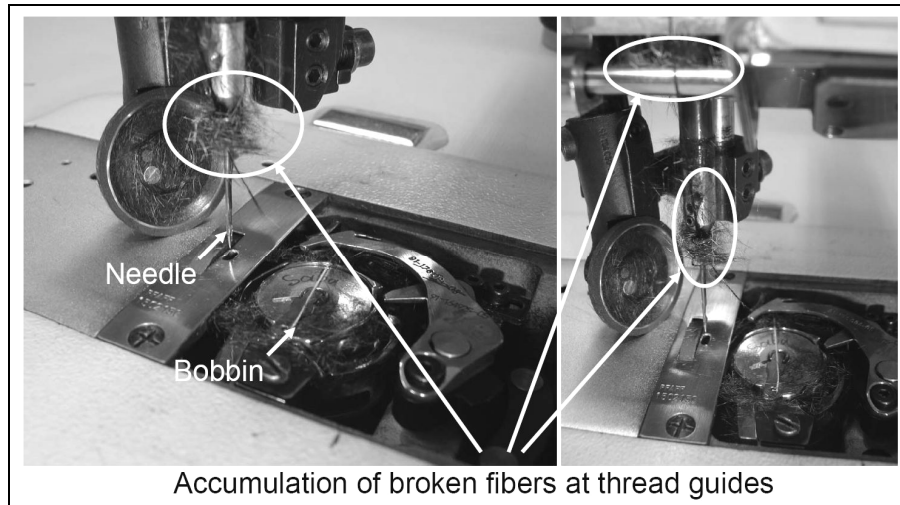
Pure twisted carbon fiber sewing thread at sewing machine elements
